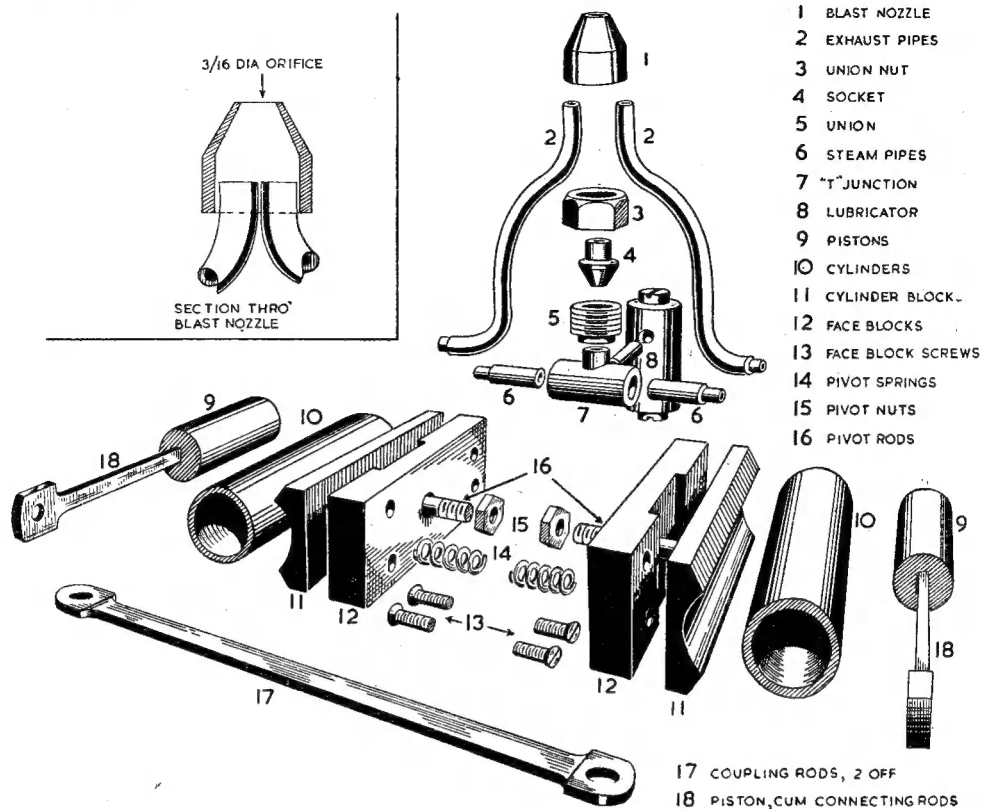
EXPLODED VIEW OF THE CYLINDER GROUP
